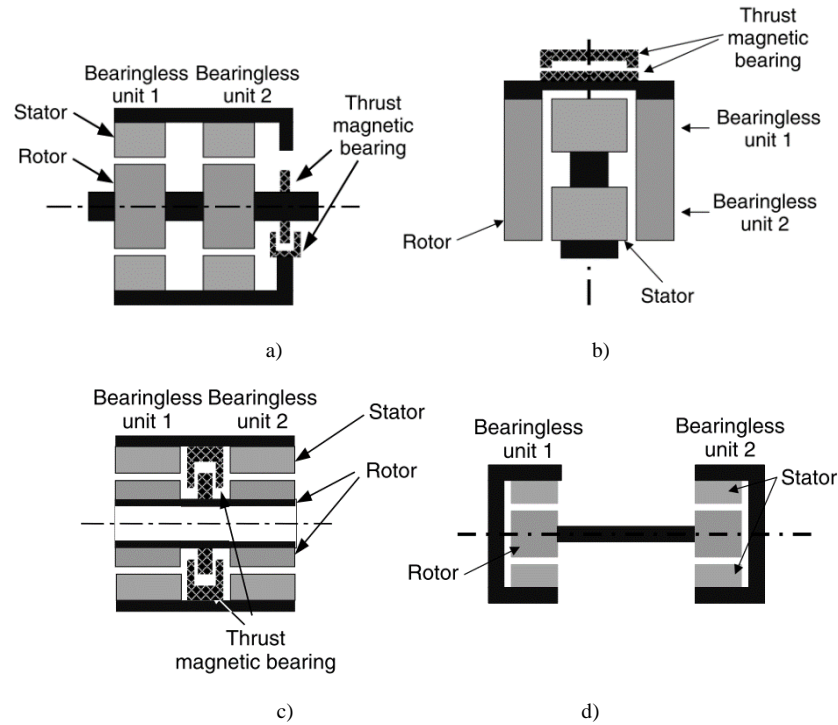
Rotary Magnetic Bearings: a) inner rotor; b) outer rotor; c) hollow rotor; d) load machine space on the shaft centre[50].
